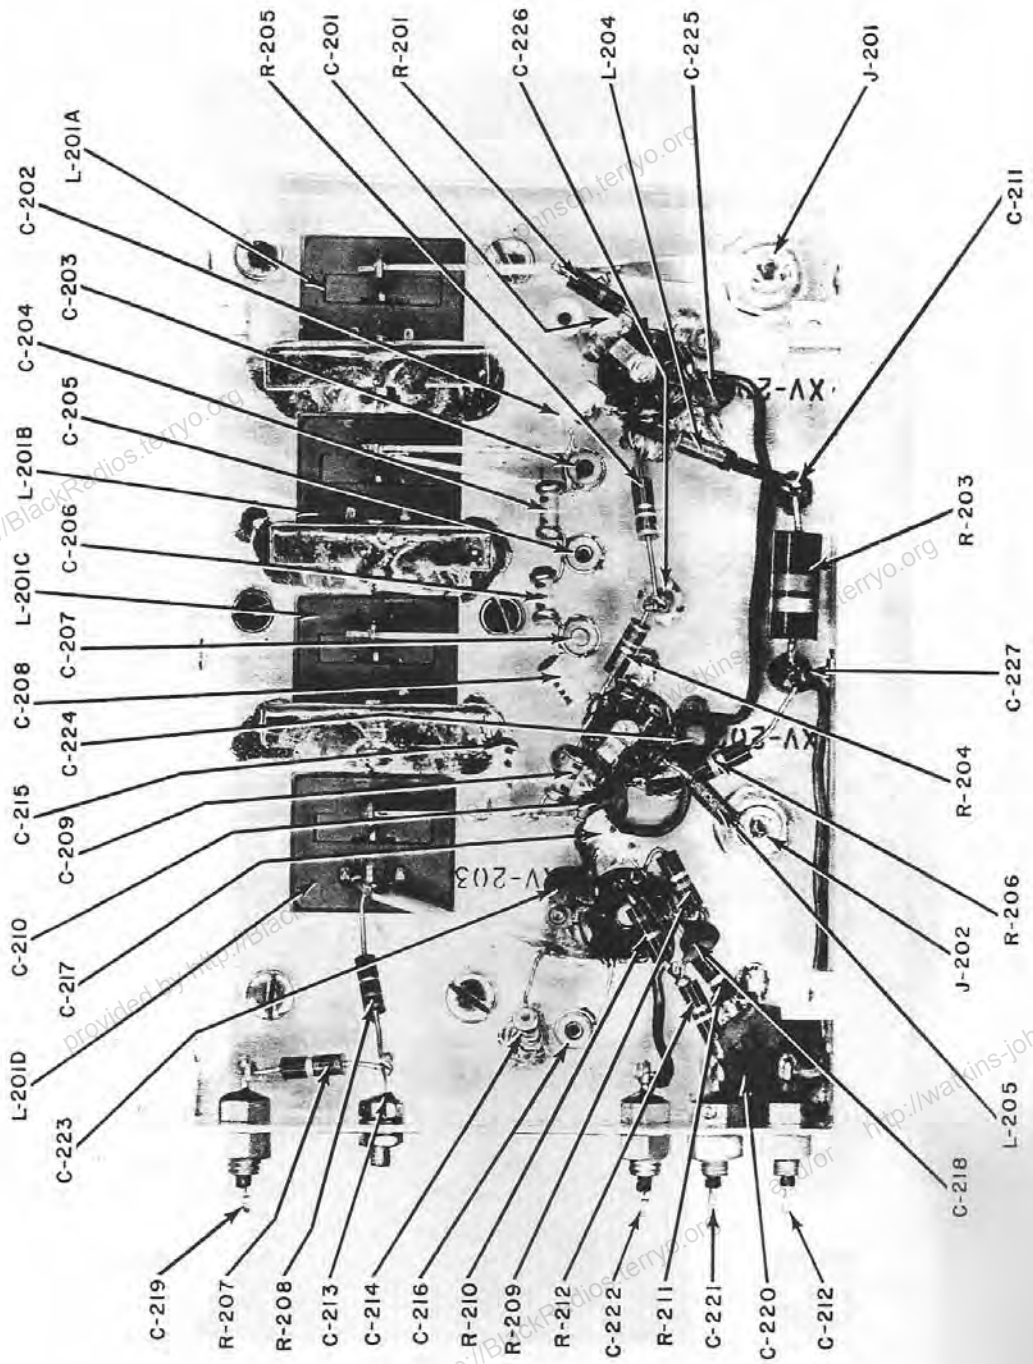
Tuner, Models 1670-E and 1670-G Special Purpose Receivers, Bottom View (Dust cover removed)
